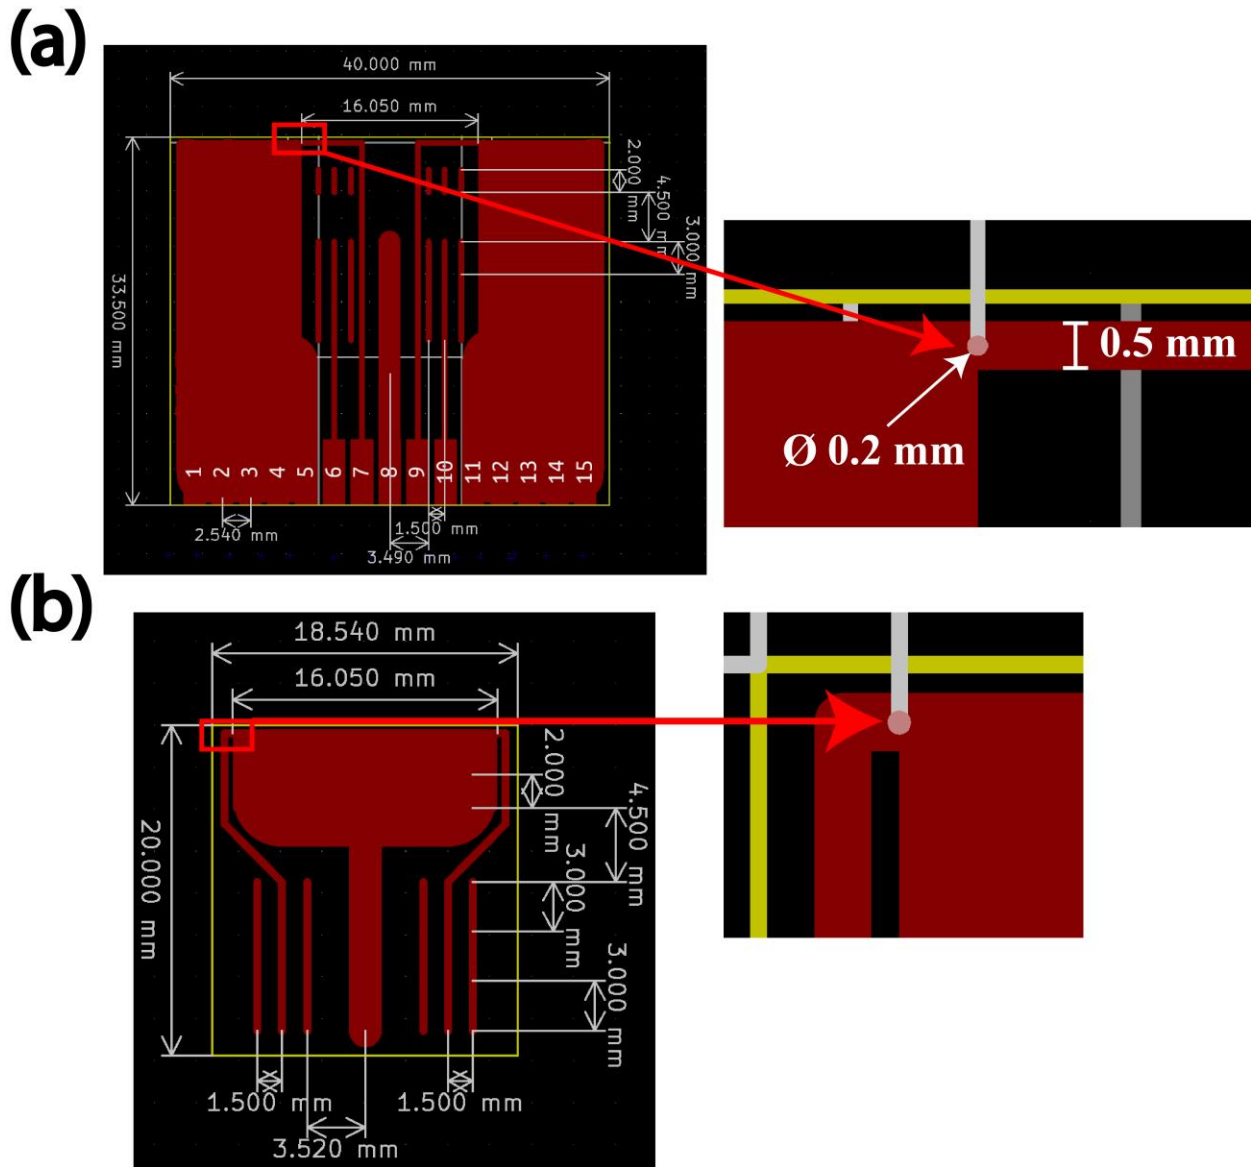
(a) Schematic of motherboard, with dimensions, showing one of current-stressed solder joints inside red rectangle (b) schematic of daughterboard and corresponding solder joint.
